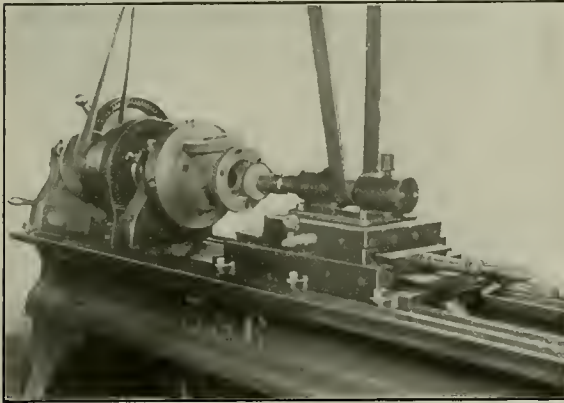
Lathe Arranged for Grinding Triple Valve Bushings
